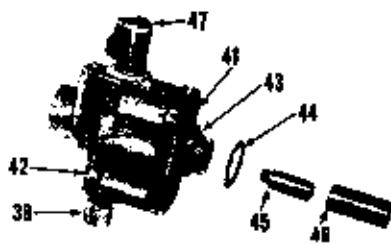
View of pto pump. Pump is serviced only as assembly shows; however, attaching parts shown are available as separate items.
